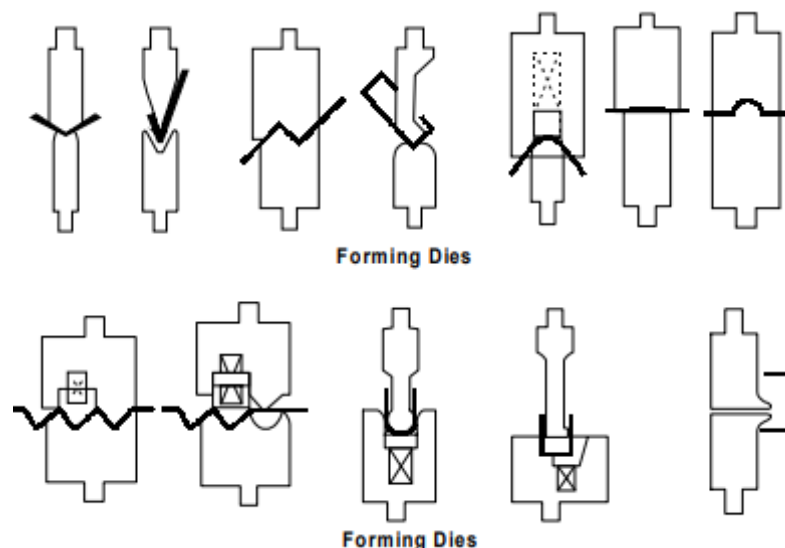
shows kinds of sheet metal bends using press brake dies (wordpress.com).
